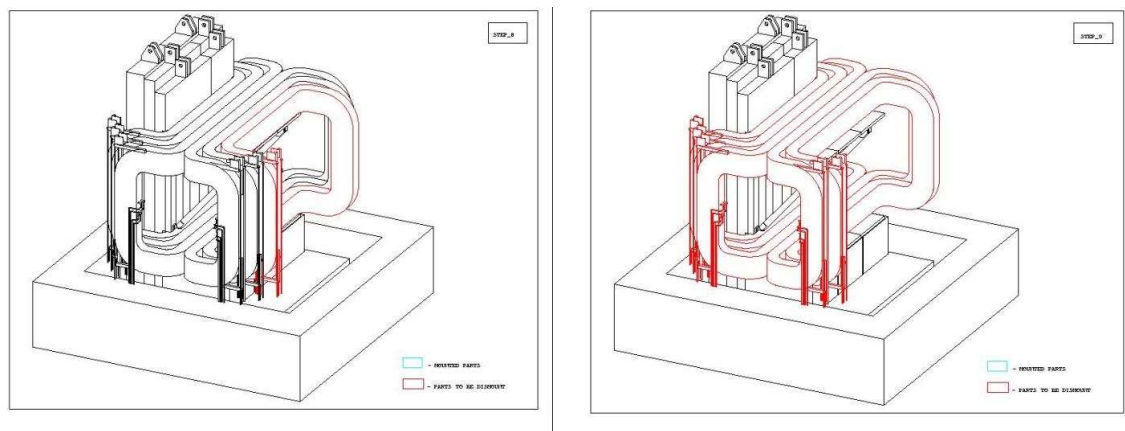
SM3 Analysis Magnet Assembly Steps 9 (left) and 10 (right)
